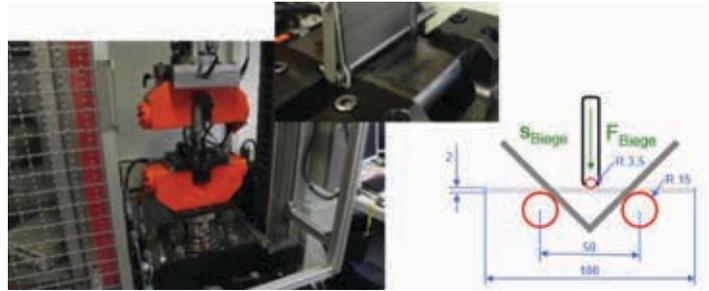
Experimental assembly for bending tests according to VDA-238 [11].
